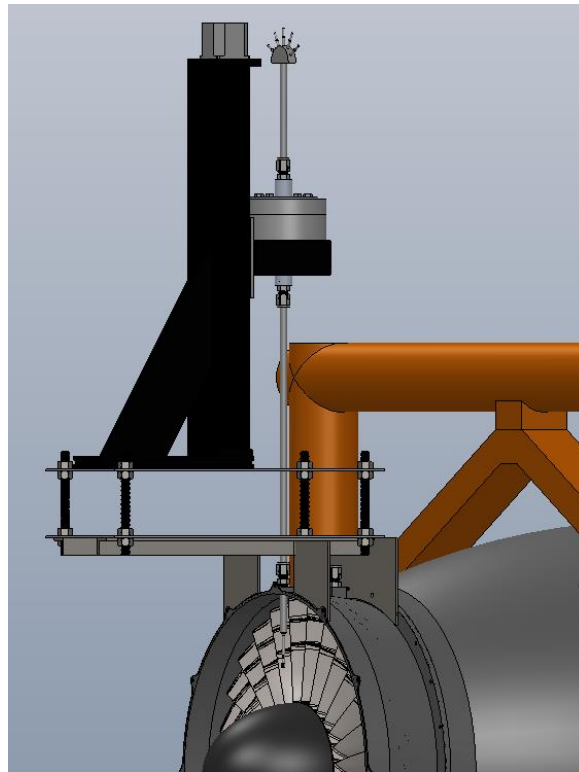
Probe Radial Traversing Mount Installed Upstream of Fan Rotor
